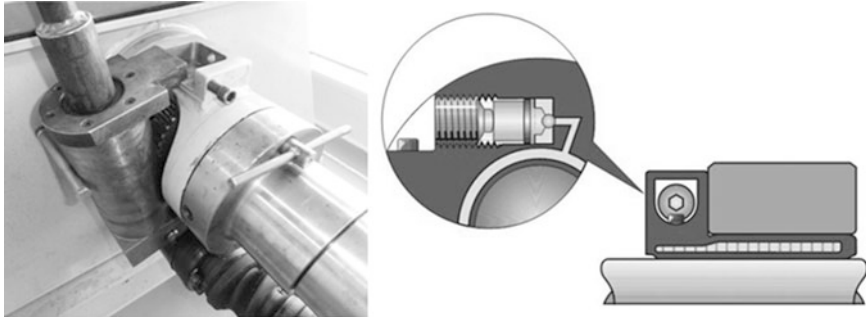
Hand operated worm gear and friction clutch “ETP Techno” for one-load level tests
